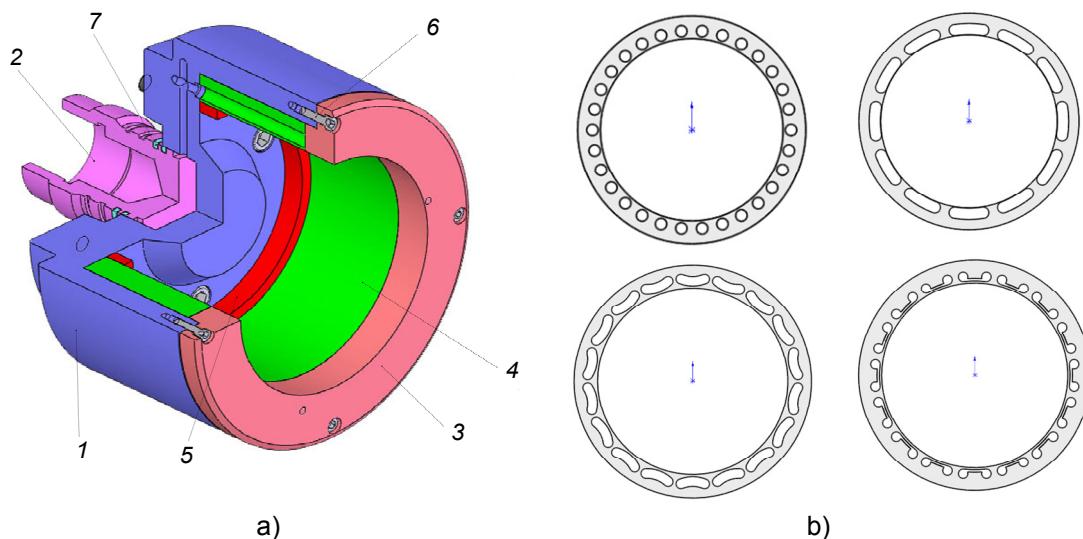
Clamping device design scheme (a) and design structural variants of bush clamping elements (b): 1 – device box; 2 – inner piston; 3 – flanged piece; 4 – bush clamping element; 5 – ring; 6 – screw; 7 – seal
